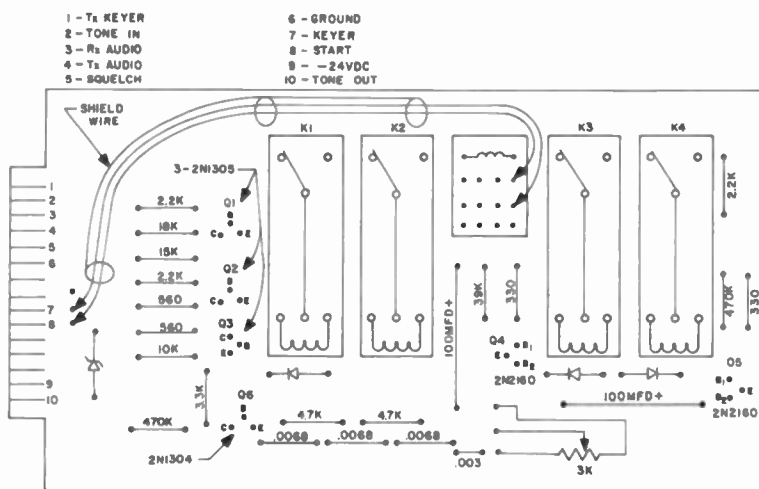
Proportionately reduced sketch of board shows coding for components and wiring interconnects.
